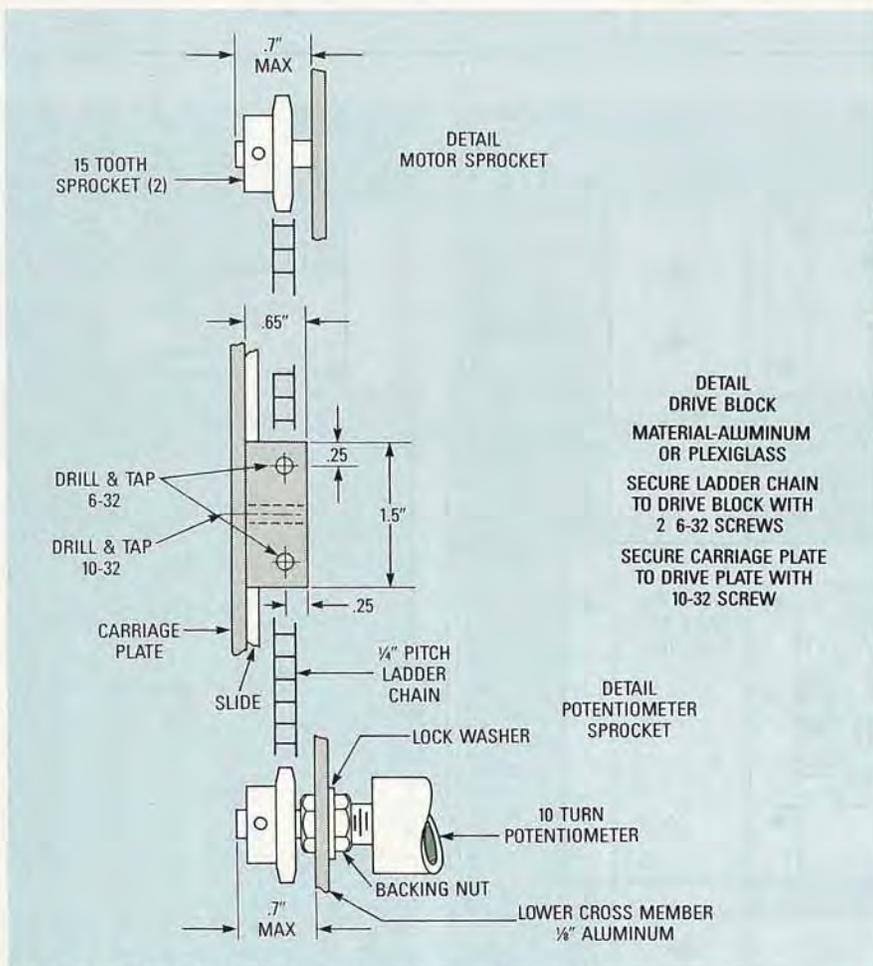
THIS DETAIL DRAWING shows the ladder-chain drive system.
